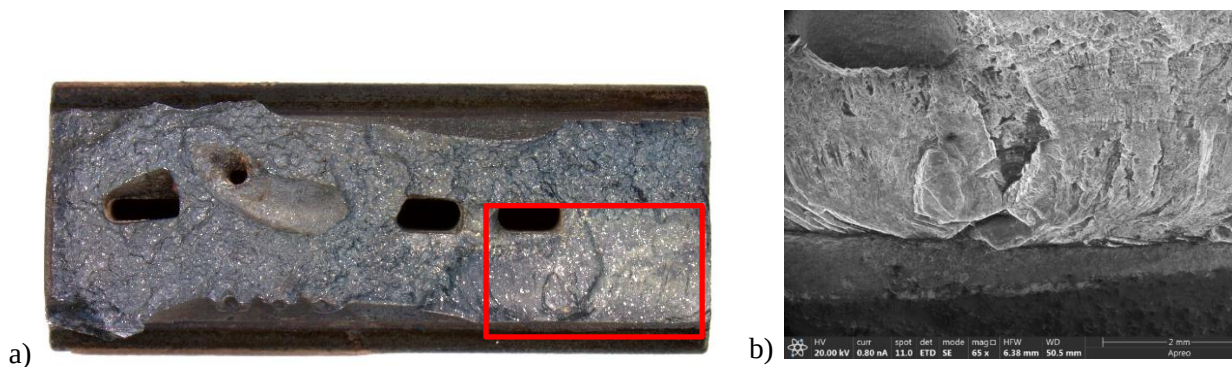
Macrofractographic characters on the fracture surface of blade 0: a) By DM, the fracture surface: slightly smooth matte texture with some reflective spots (framed in red) and the remaining fracture rough matte texture. b) By FESEM, detailed picture of the fracture surface with possible origin and CPMs.
